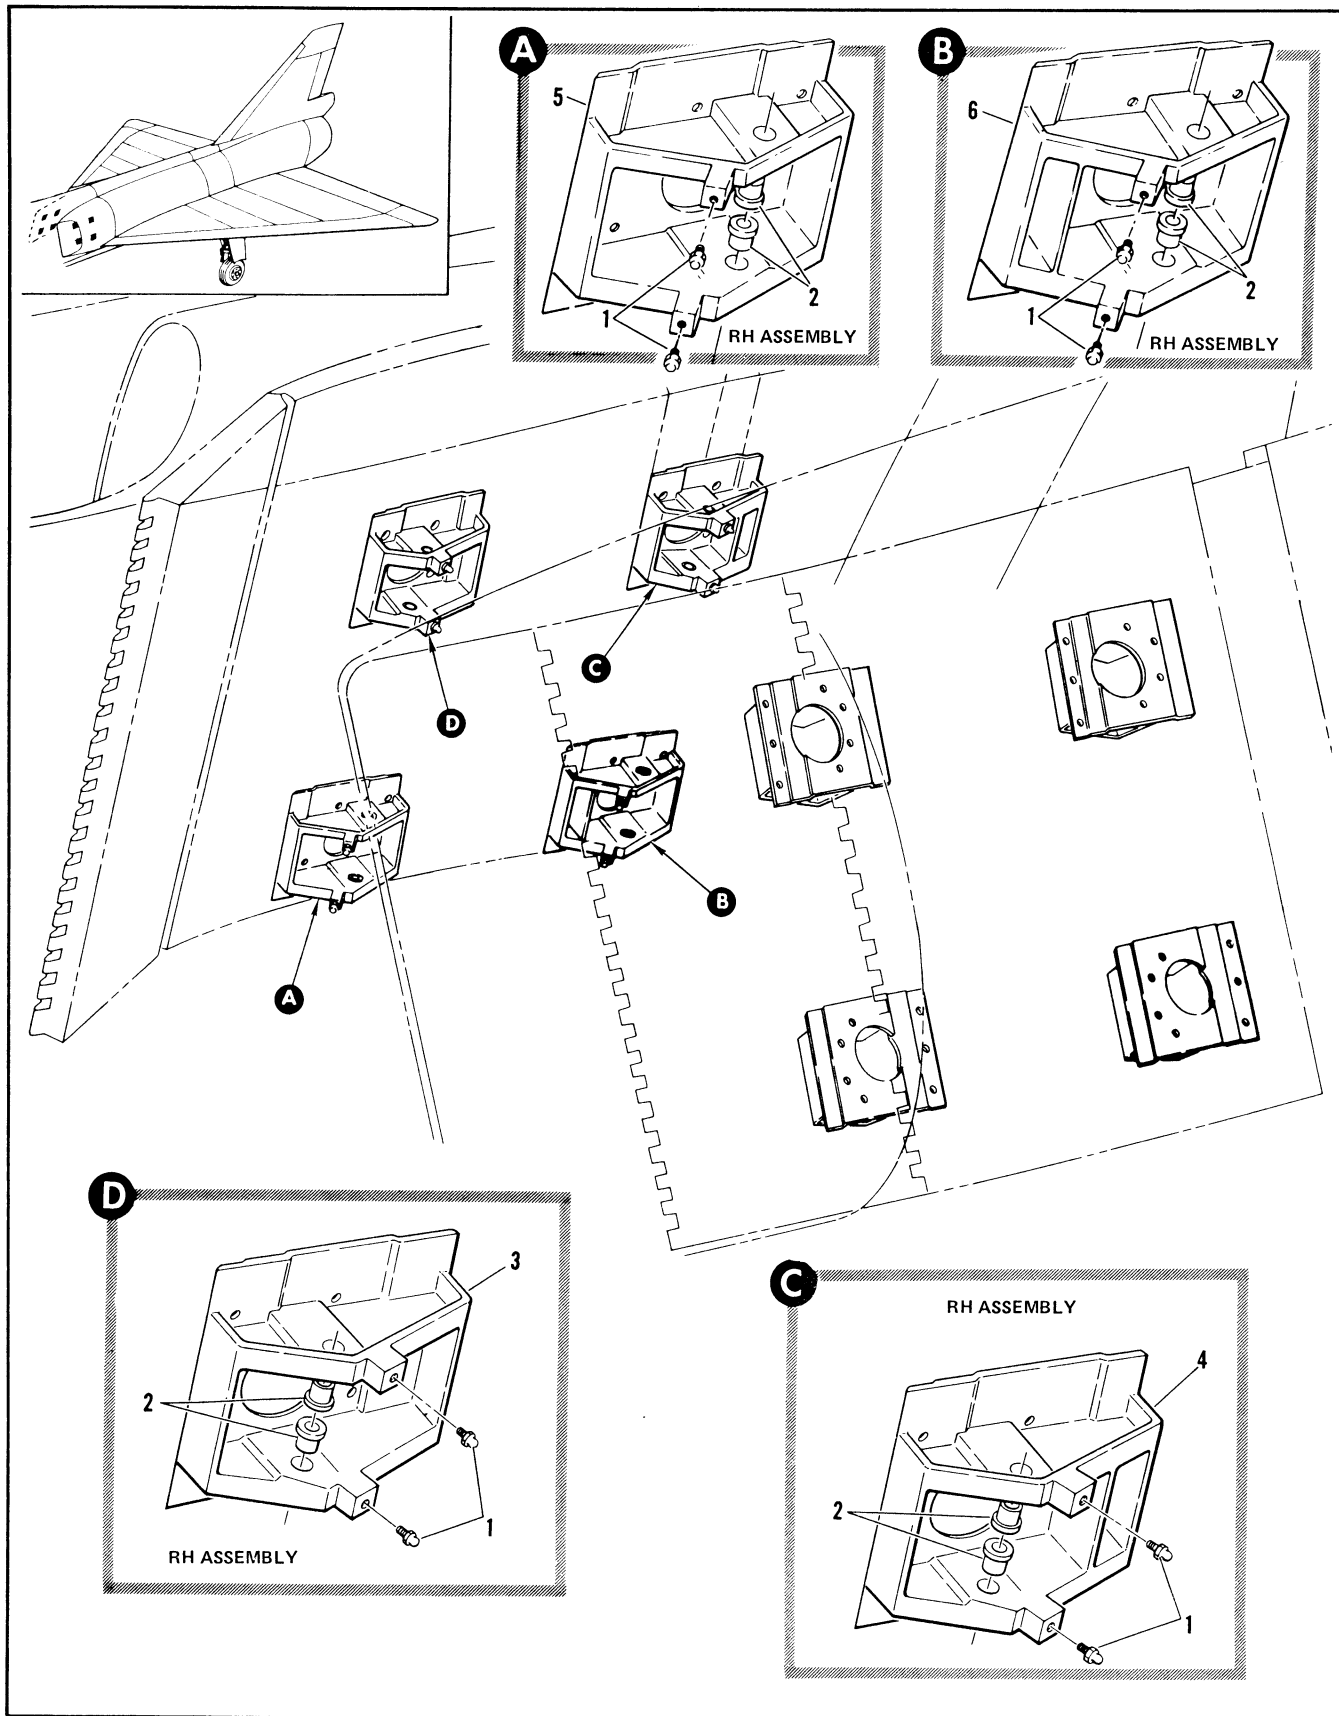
Variable Air Ramp Screw Jack Support Assembly
